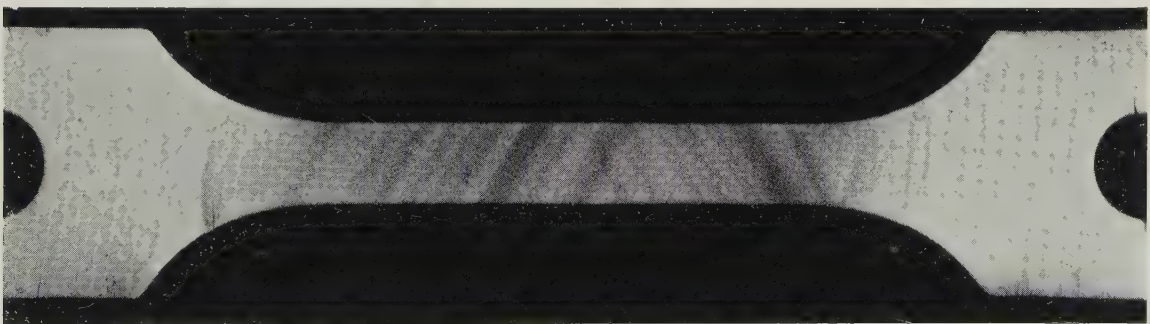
Showing Ring and Type-*B* Markings in Specimen of Commercial Aluminium-3½% Magnesium Alloy Pulled to Approx. 4% Extension on Amsler Machine. × 1.
